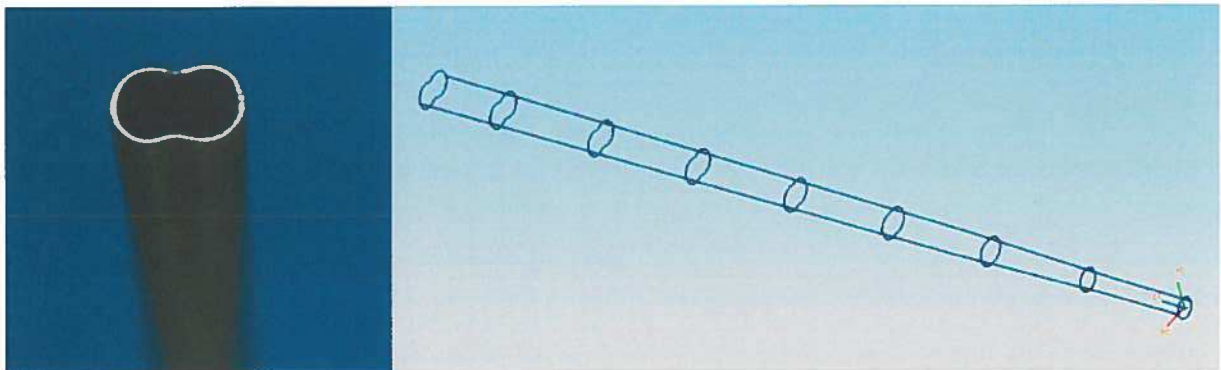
Laser-consolidated IN-625 cold spray nozzle with irregular cross sectional shapes
